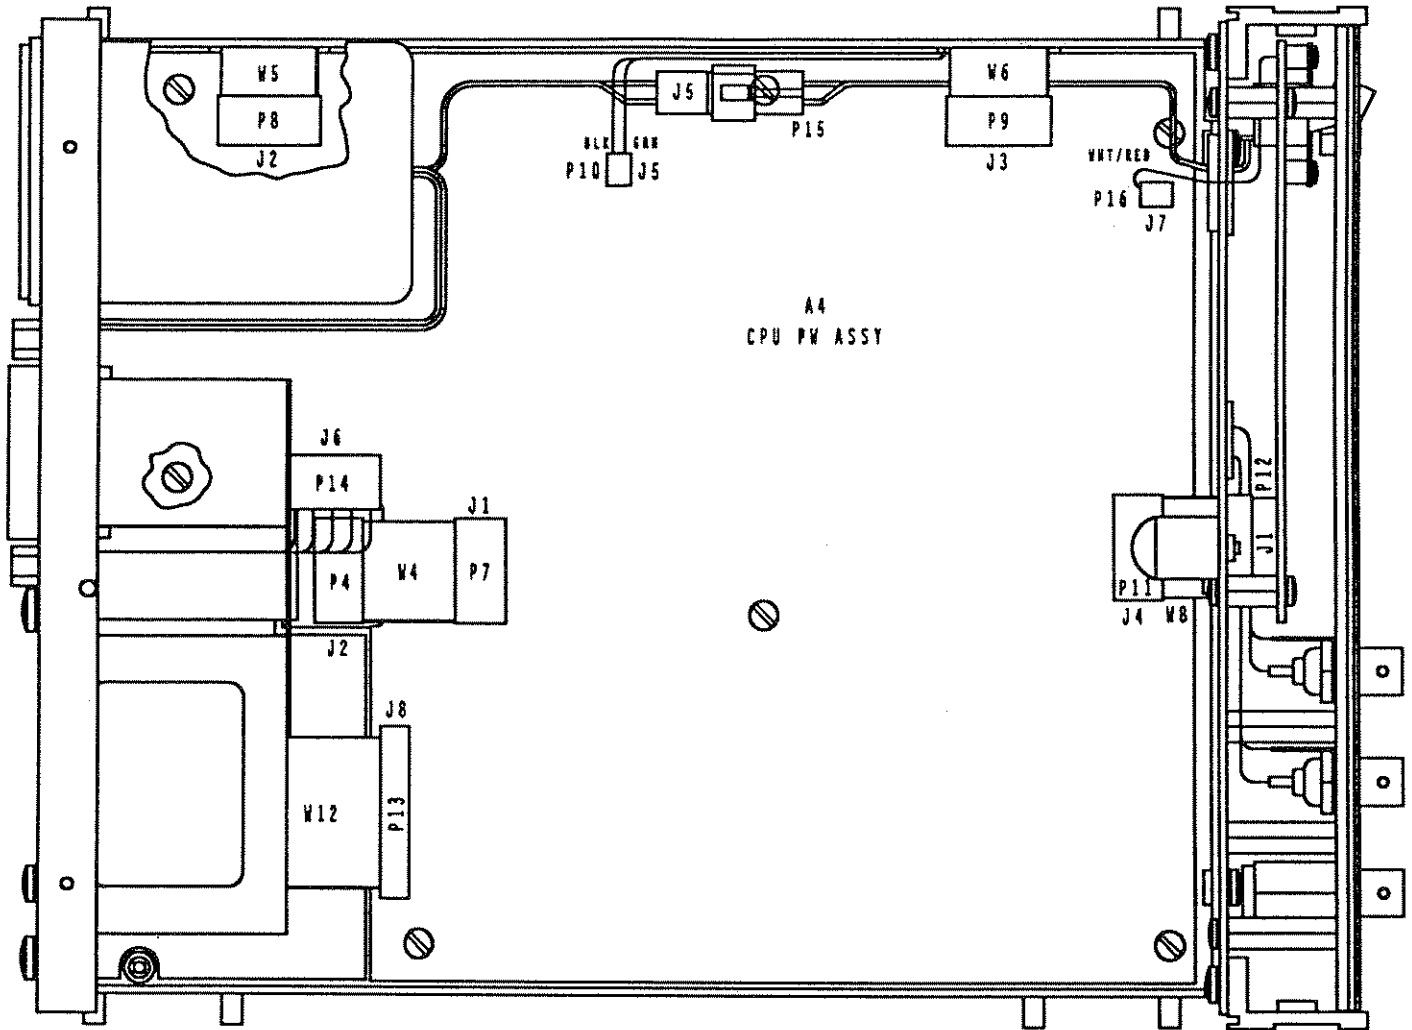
MAJOR ASSEMBLY LOCATION, TOP VIEW.
